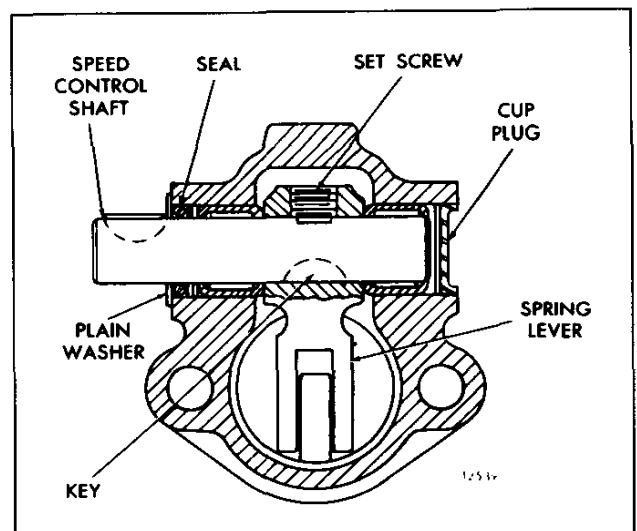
Cross Section of Governor Spring Housing and Lever Assembly
